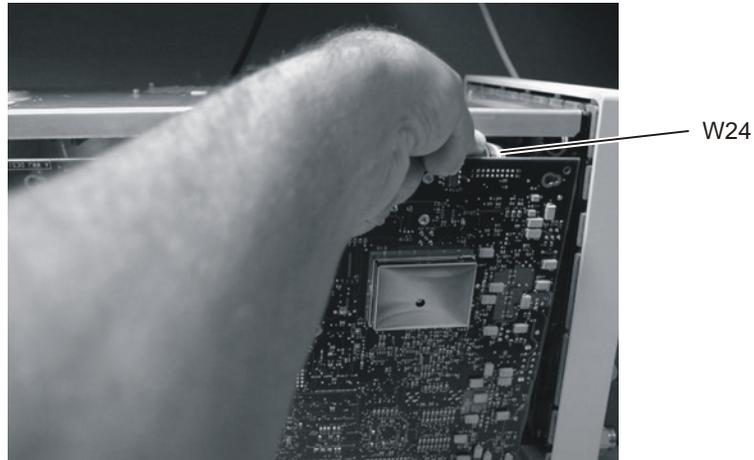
Removing the W24 Ribbon Cable from P24 SRC_SEL
